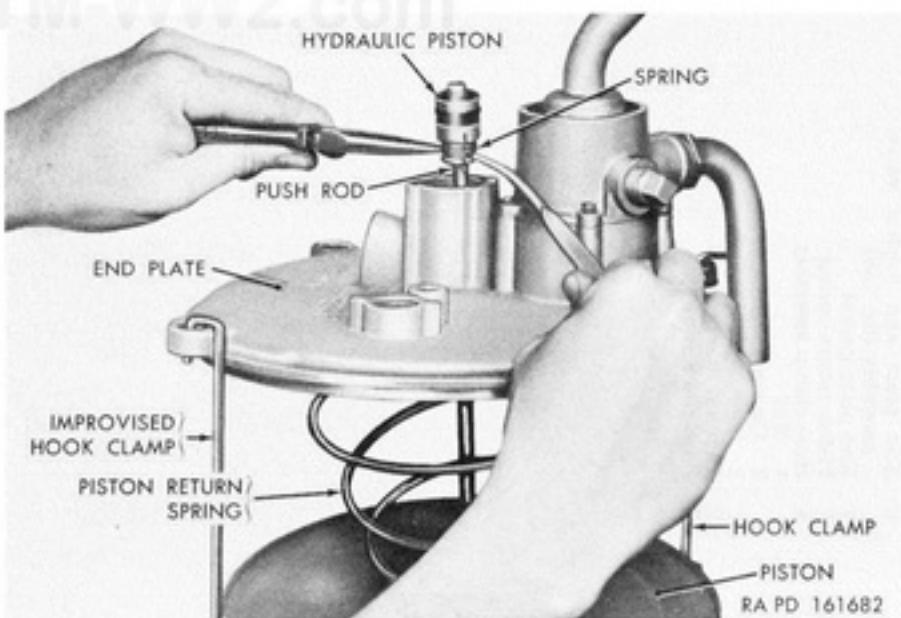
Removing hydraulic piston from vacuum-hydraulic power cylinder (third series Hydrovac).
